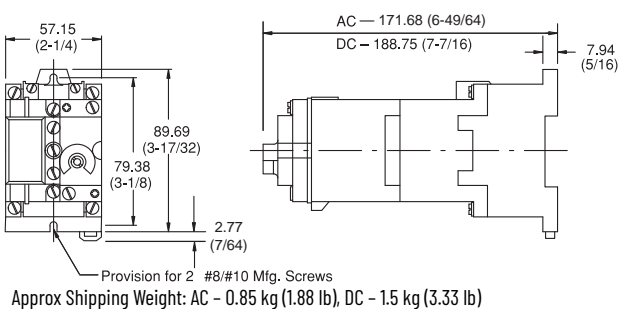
700-P Relay with Mechanical Latch Attachment
